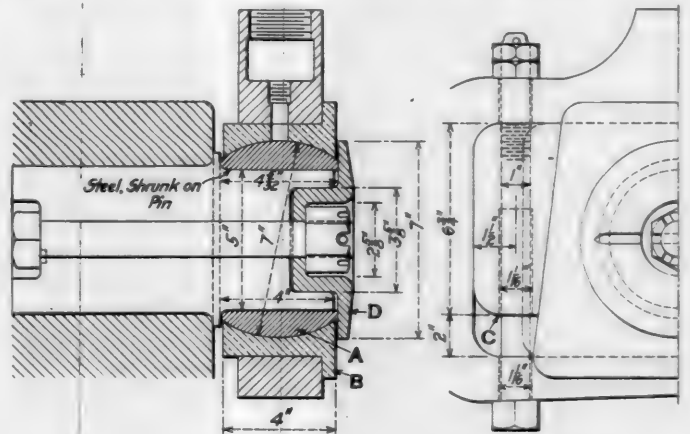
Detail of Ball Bearing Crank Pin and Rod Brass
